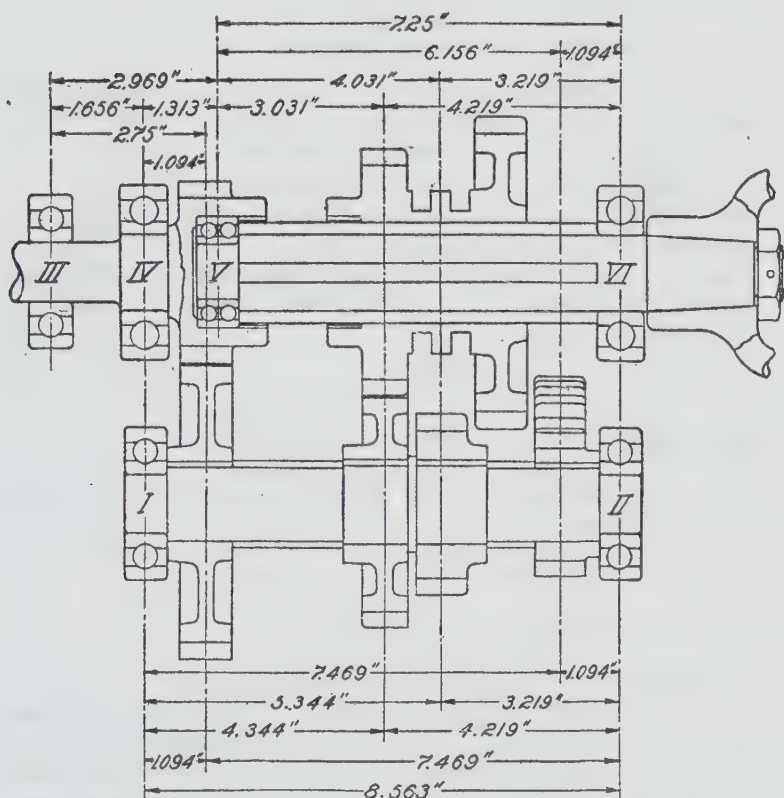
LAYOUT OF GEARSET UNDER CALCULATION.
